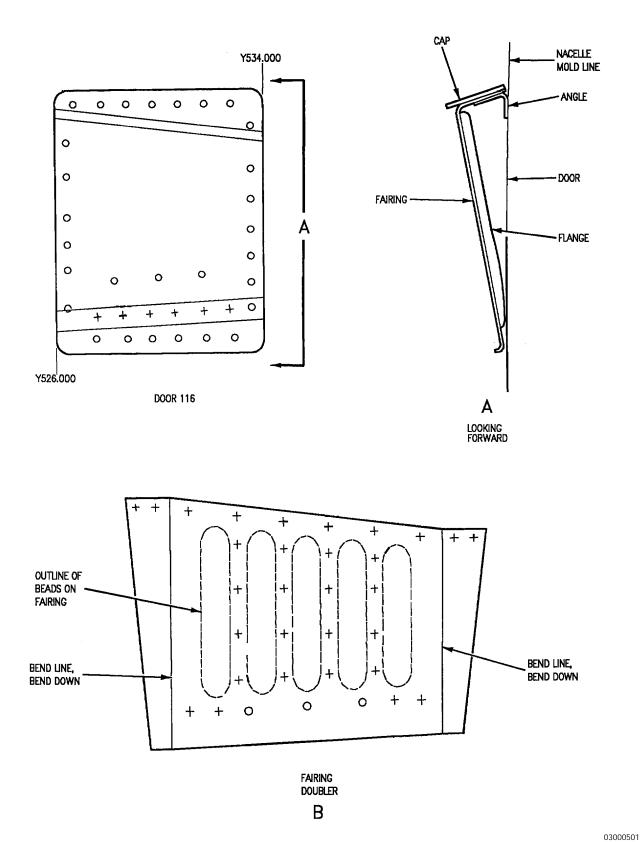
Door 116 Fairing Repair, Wing Trailing Edge to Fuselage (Sheet 1)
